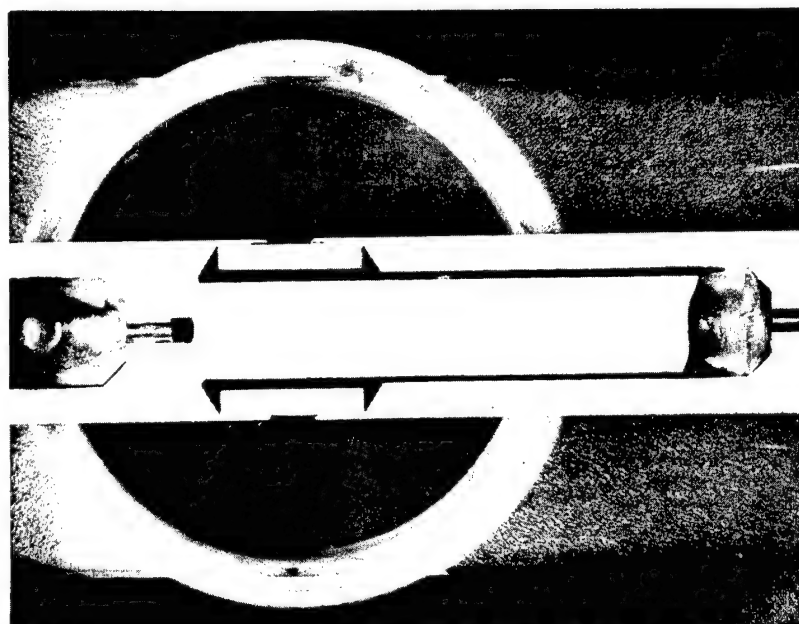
Polished Longitudinal Section of a Plasma Thermocouple Assembly of an Early Design.
